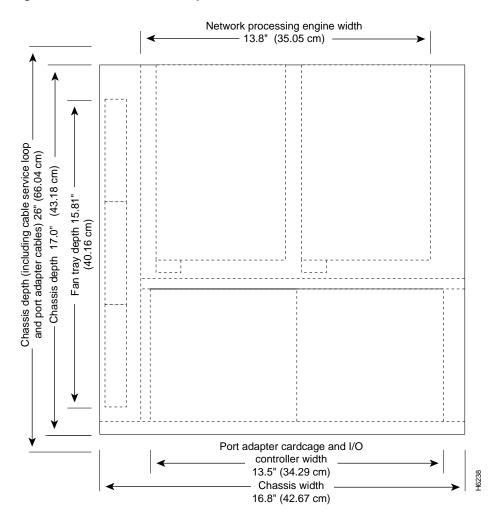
Cisco 7206 Footprint and Outer Dimensions
